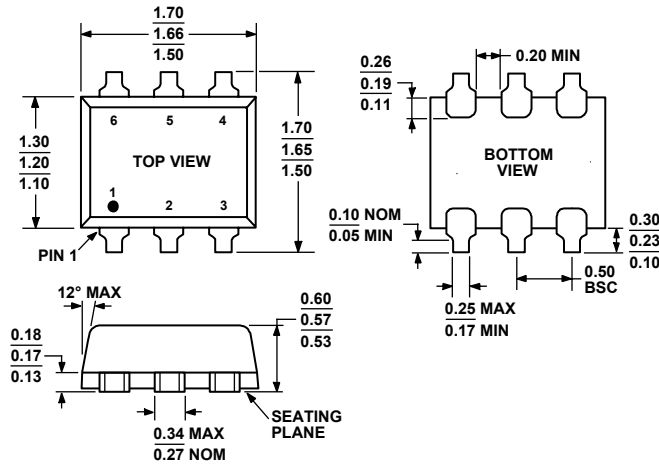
6-Lead Small Outline Transistor Package [SOT-66] (RY-6-1)
